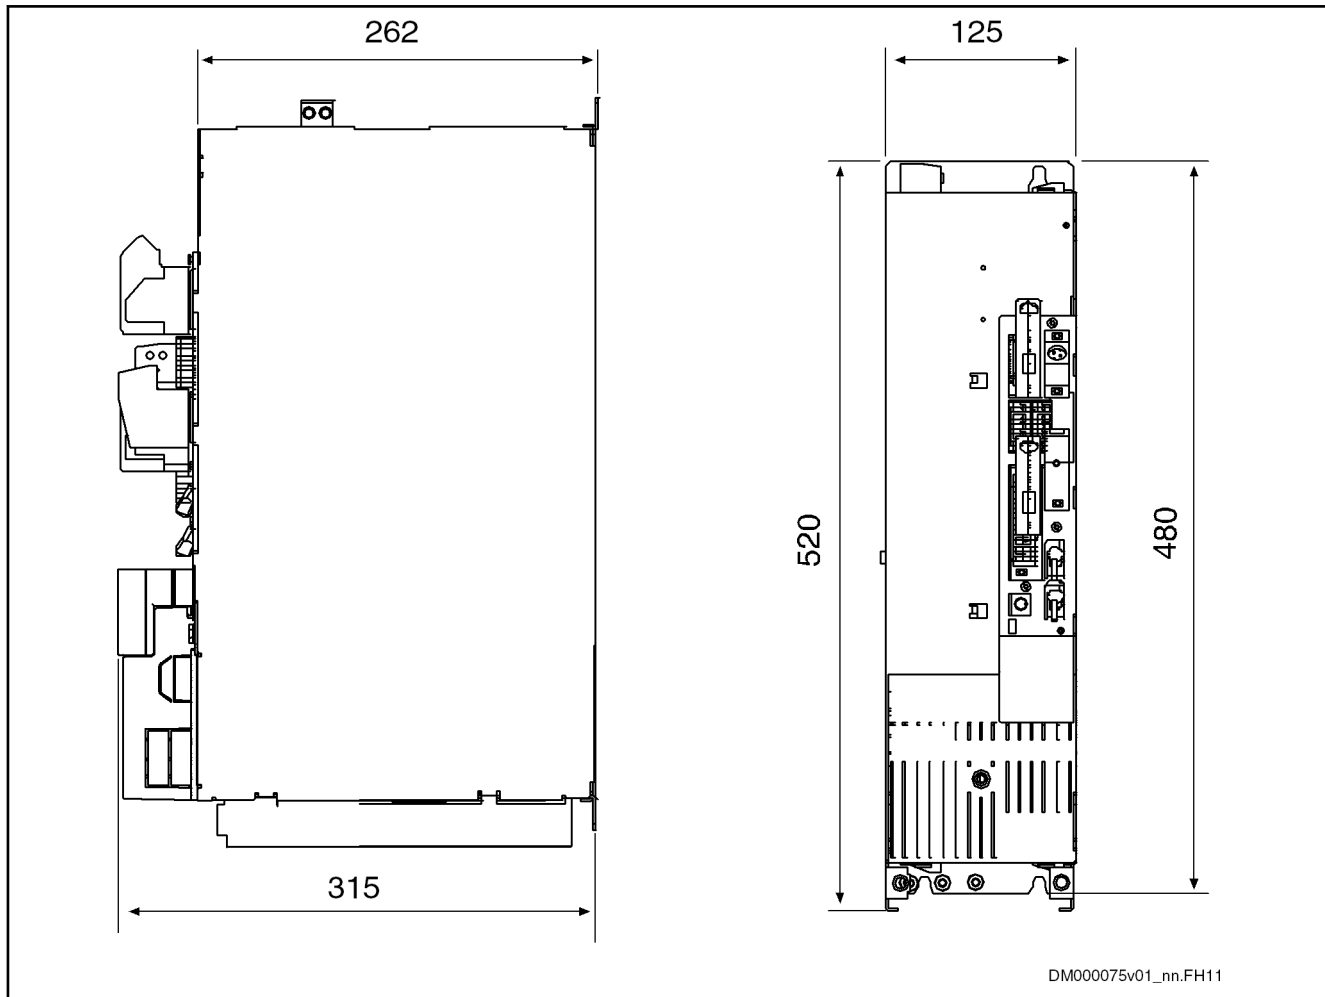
Dimensional drawing HCS03.1E-W0070
